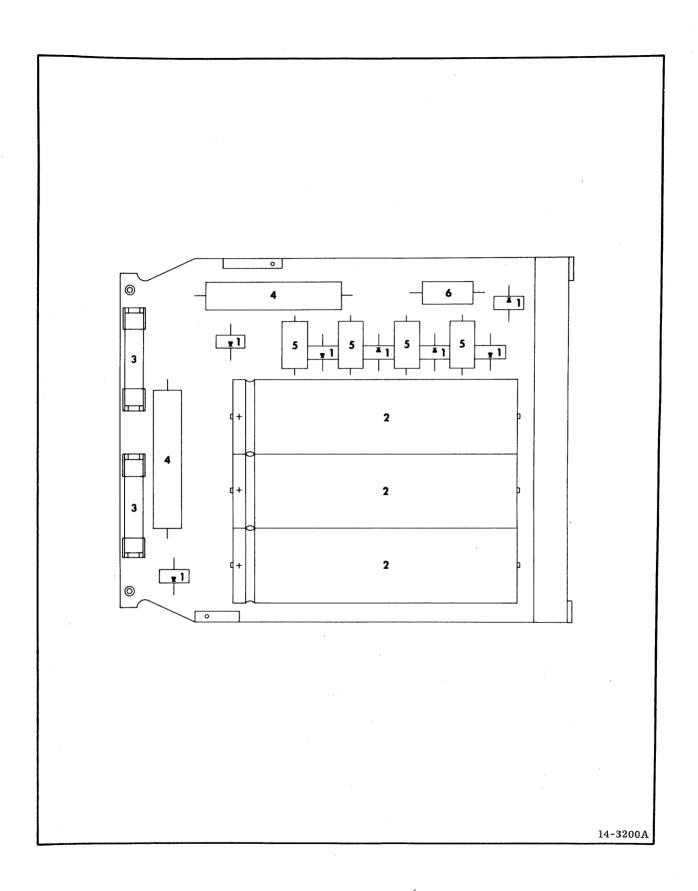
Component Assembly, Type _SJV Used on 3 Card Power Supply Only
